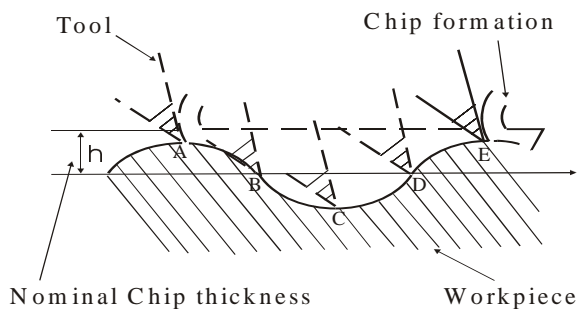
The variation of clearance angles due to the vibration of the tool/tool-holder/spindle assembly with respect to the workpiece
